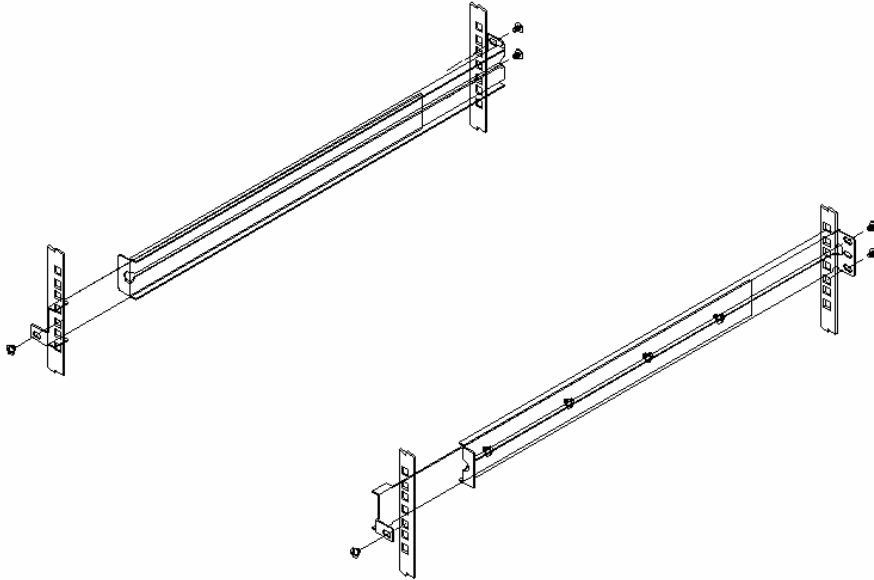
Attaching left and right easy-installation mounting rails to the racks
